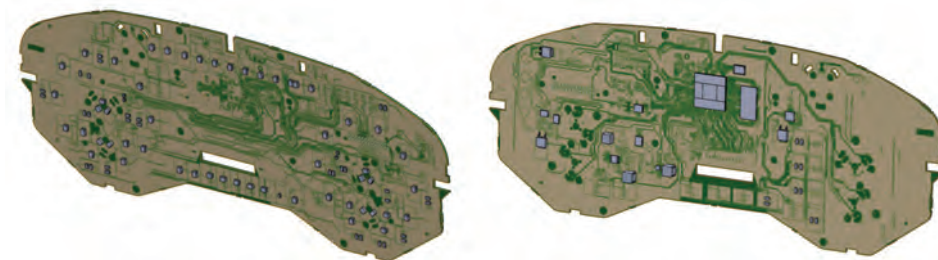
PCB Assembly 3D Thermal Representation Front and Rear Views
